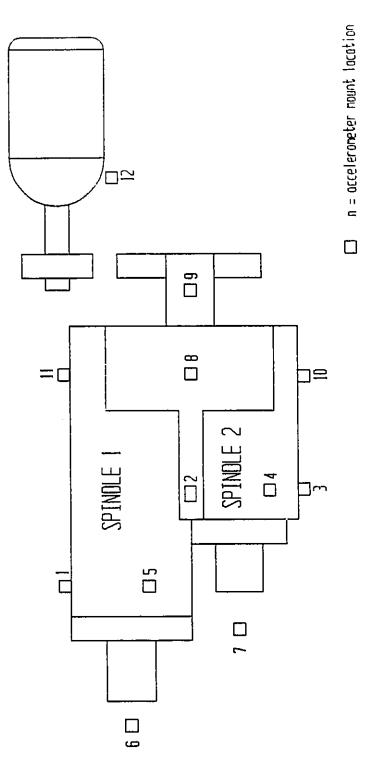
Machine Head - Table base initial 13 vibration positions of study
